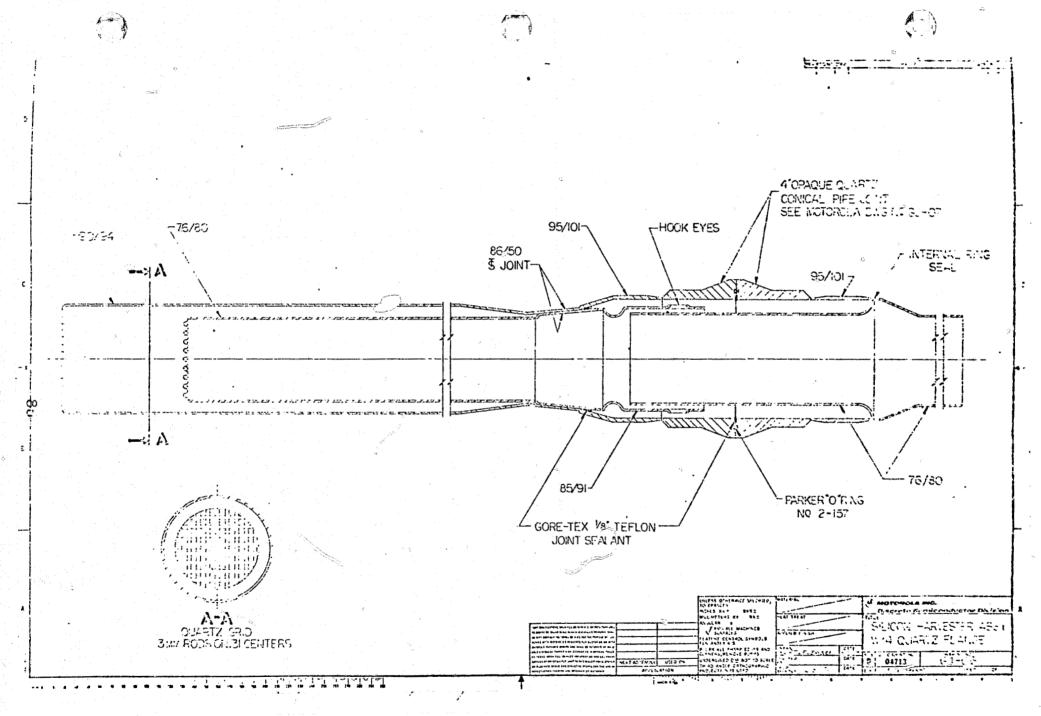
Shown above is the removable silicon harvestor. It is comprised of a Quartz sleeve insert containing the silicon bed which seals with Gore-Tex Teflon Joint Sealant. The bed is removed by opening the seal (see Figure 2.3.6) located above the bed and pulling the bed via the hook eyes. The Si bed is heated with a resistance furnace (not shown).
